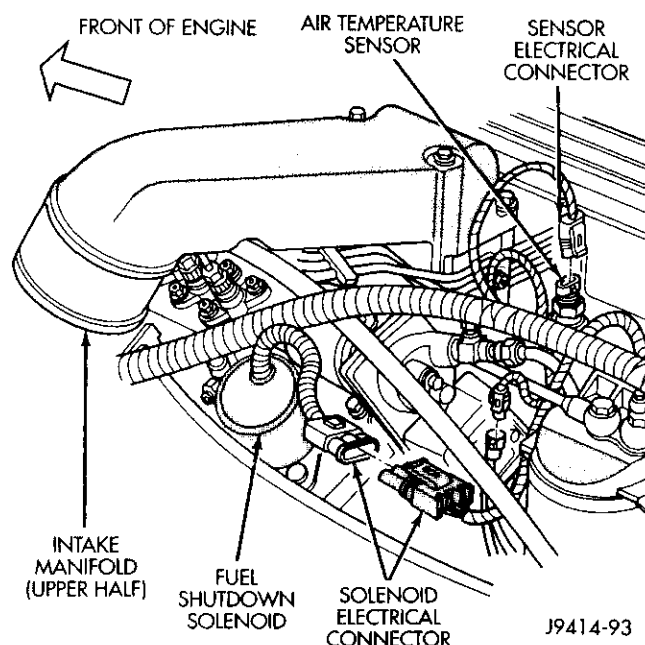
Fuel Shutdown Solenoid Connector - Diesel Engine
